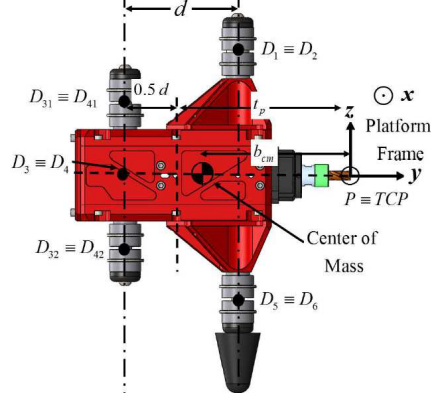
Side CAD view of the traveling plate of ARROW PKM. [22].
